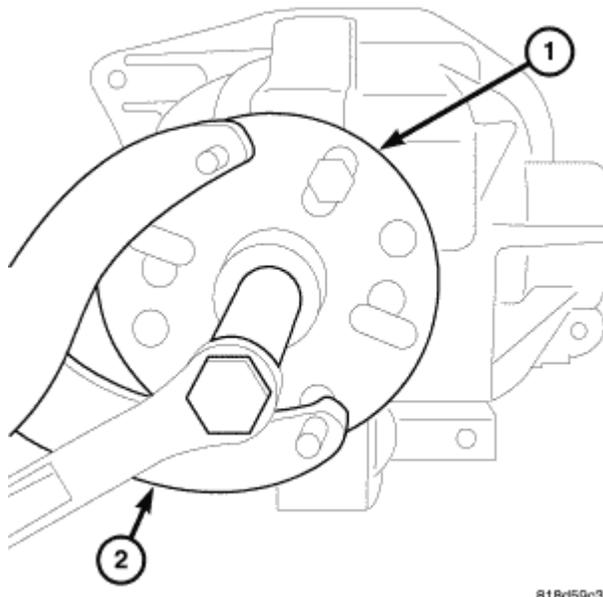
Removing Pinion Flange With Puller C-452 And Flange Holder C-3281
